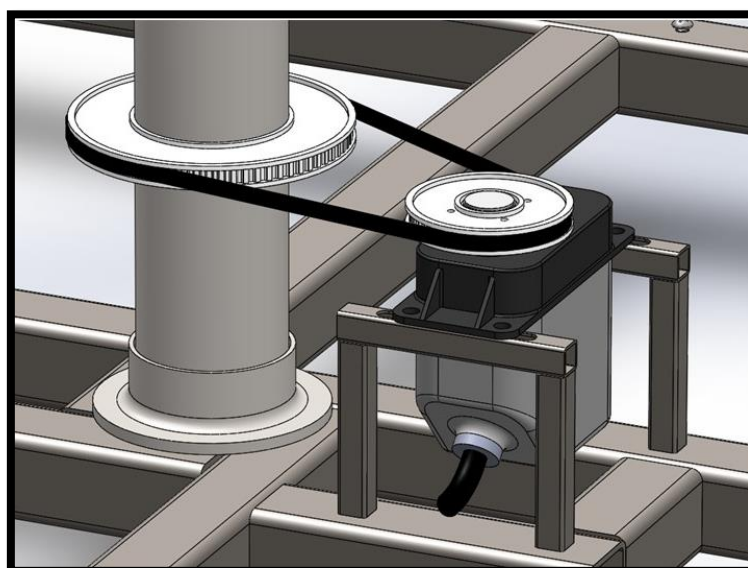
Complete Timing Belt and DC Electric Motor Base Assembly
